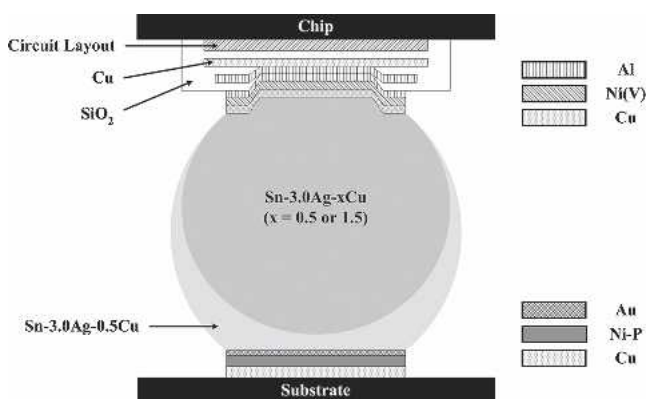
Schematic illustration of the flip chip Sn-3.0Ag-(0.5 or 1.5)Cu solder joint employed in this study. The test chip with ball-shaped Sn-3.0Ag-(0.5 or 1.5)Cu solder bumps was flipped over and assembled to a BT substrate with Sn-3.0Ag-0.5Cu presolder bumps. A sputtered trilayer of 1.2 μm Al/1.0 μm Ni(V)/0.5 μm Cu thin film was used as UBM structure on the chip. In addition, the surface finish on the Cu pad at BT substrate was the electroless Ni-P(5μm)/immersion Au(0.1μm) structure.
